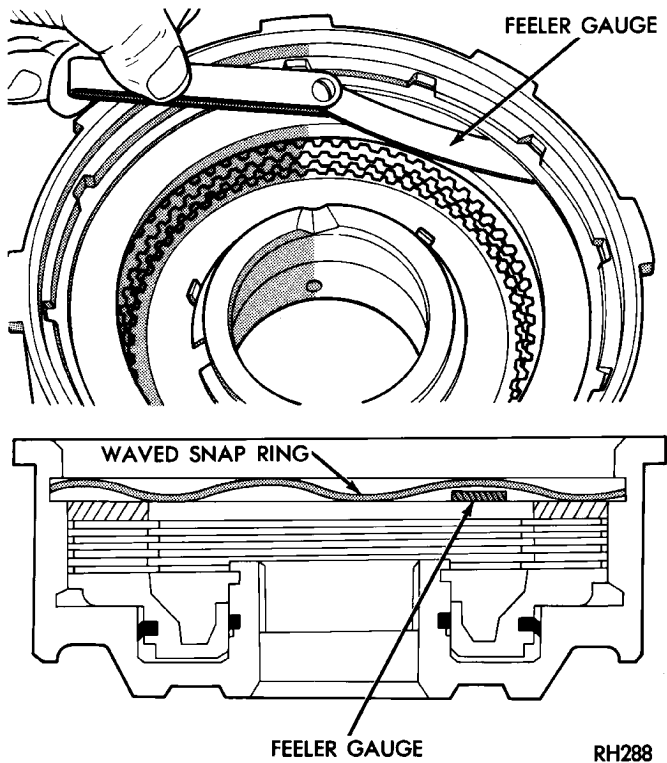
Typical Method Of Measuring Front Clutch Pack Clearance
